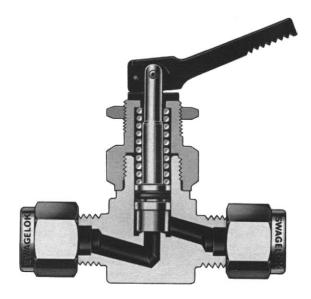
Barstock globe valve with compression fittings Courtesy of Swagelok Company
